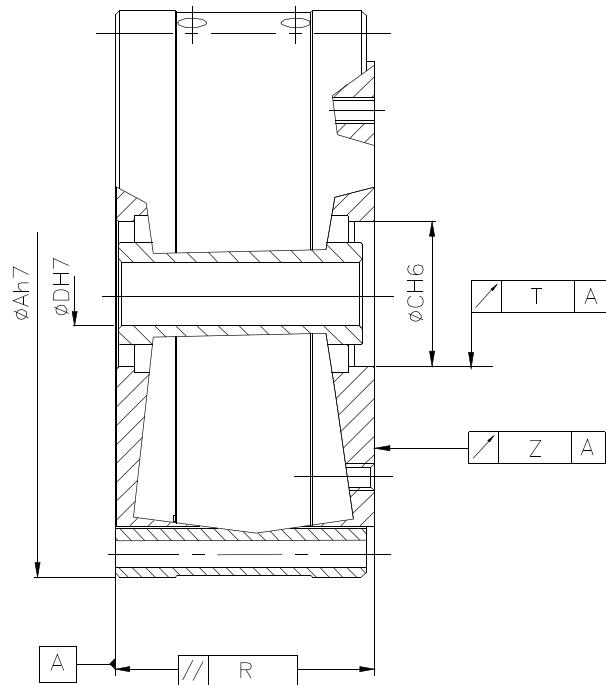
Circumferential and front run-out values of TwinSpin bearing reducers /
